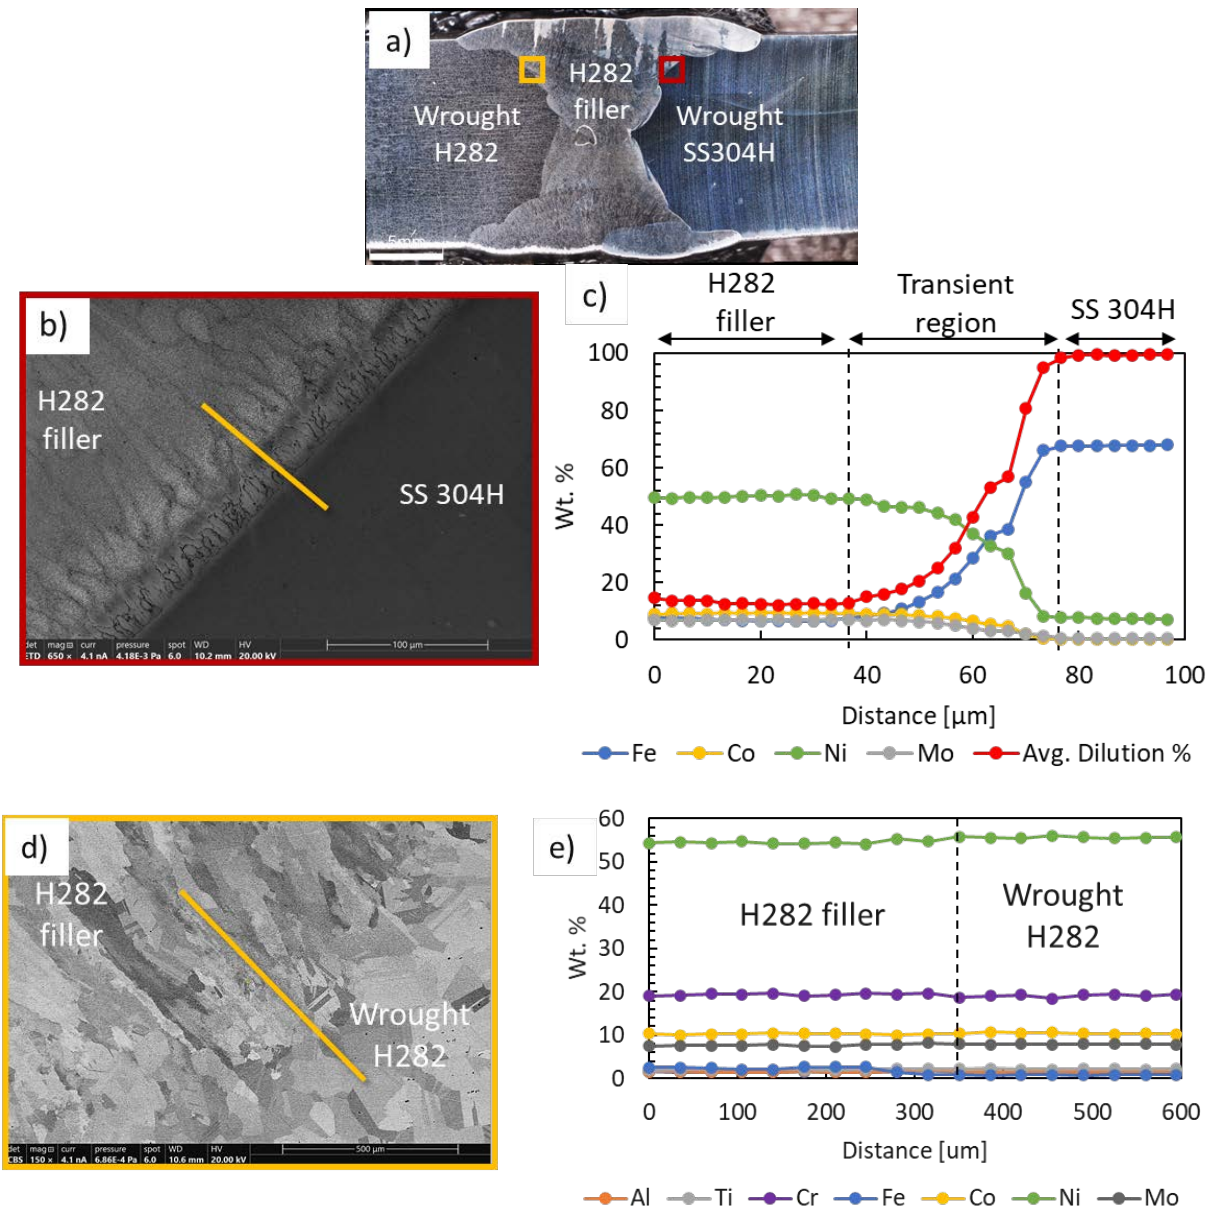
(a) Macrograph of dissimilar weld between wrought H282 to SS304H in fully aged condition. (b, d) SEM images of the filler/SS304H side and filler/wrought H282 side interfaces, respectively. (c) EDS line scan showing the average dilution level in the transient region and weld zone adjacent to the SS304H side. (e) Matching chemical composition between the filler and wrought H282 side
